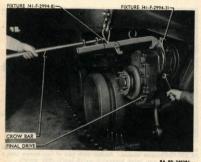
Removing Final Drive Assembly, Using Fixtures 41-F-2994-3 and 41-F-2994-8
